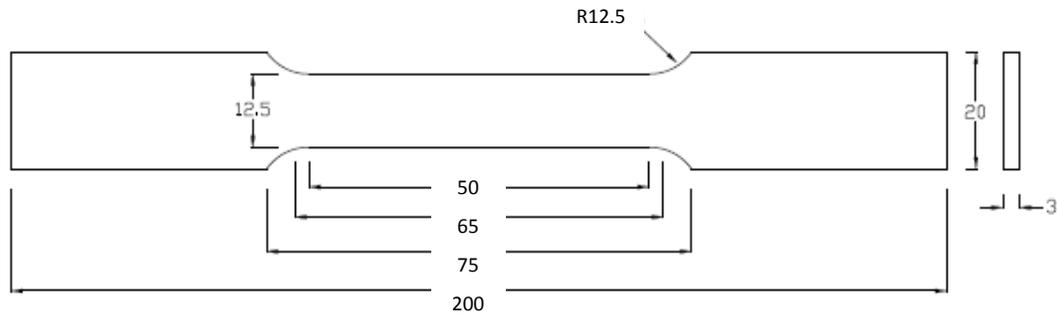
Standard Tensile Test Specimen. All dim. in mm for plane specimen [ASTM E8M]
